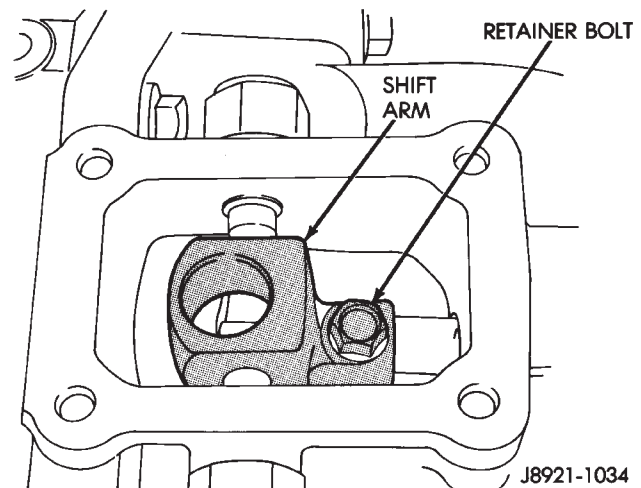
Shift Arm Retainer Bolt Removal/Installation
